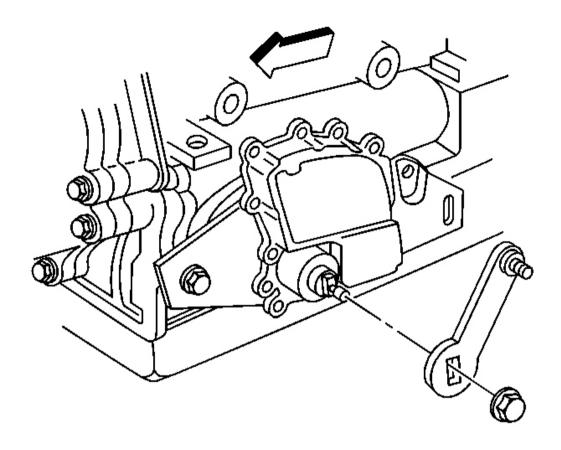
Range Selector (Shift) Lever & Nuts Courtesy of GENERAL MOTORS CORP.
